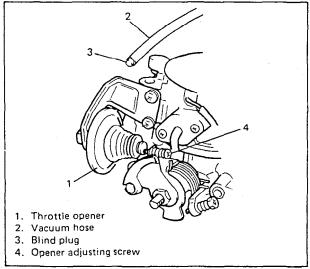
E-89 Checking and Adjusting Engine Speed for Opener
